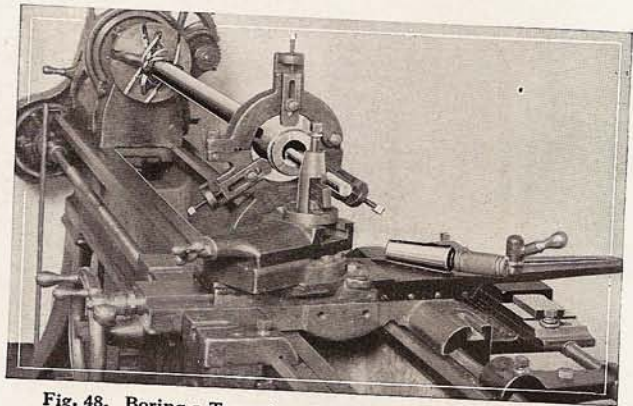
Boring a Taper in a Driveshaft Held in Center Rest in the 16-inch South Bend Lathe.
